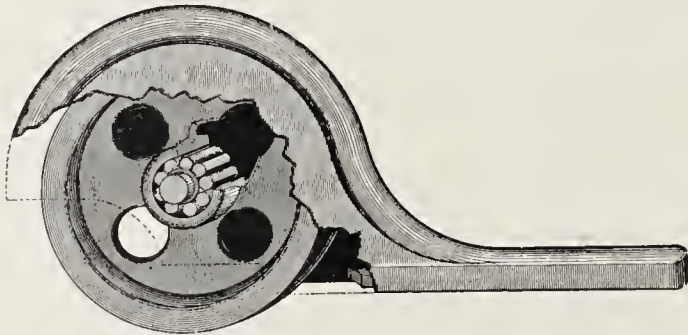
SECTIONAL VIEW OF GRANT OVERHEAD PULLEY, WITH ROLLER BEARINGS.
